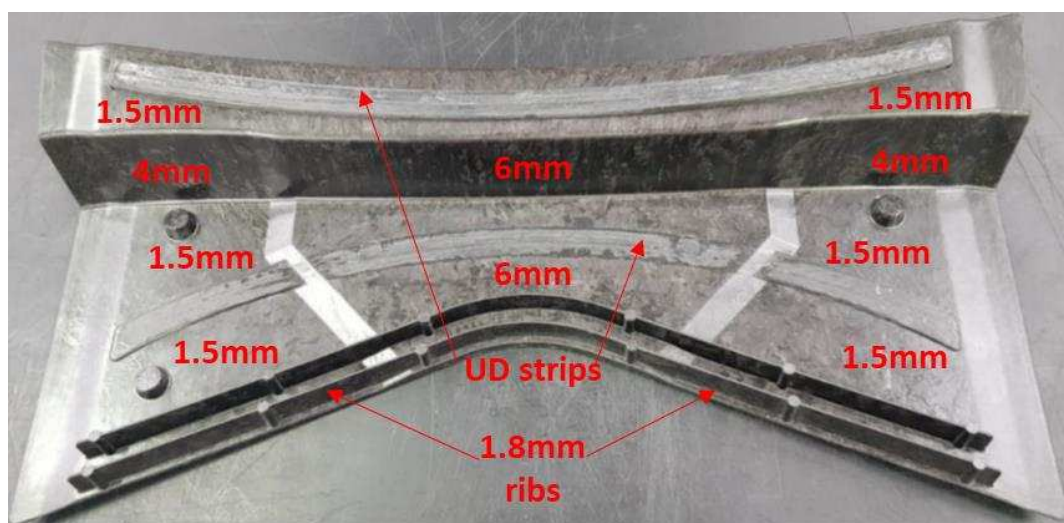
The rear header demonstrator component manufactured using carbon fibre SMC and UD strips. An SMC only version is used in this paper where the cavity for UD reinforcement were filled with SMC
